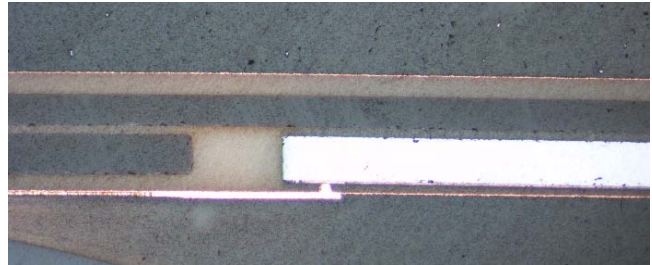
Cross section of the embedded sensor package test vehicle showing die embedded within ultra-thin glass cavity
